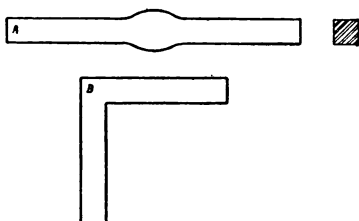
Making a right angle. A-Iron bar after heating and upsetting for bending. B-Finished angle.
